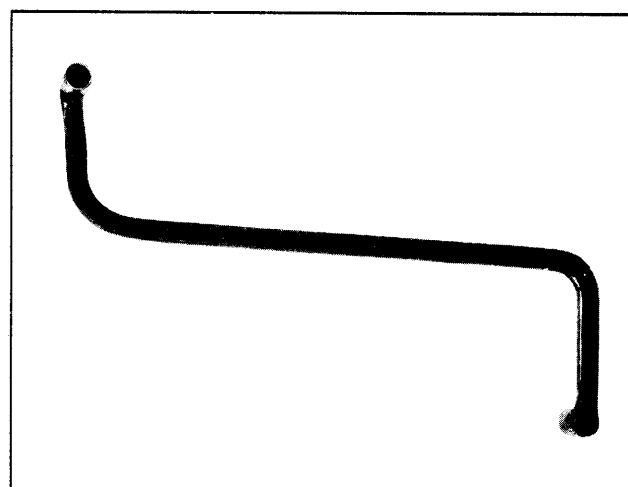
Front Door Hinge Tool J-22810 - "A, B & C" Styles
